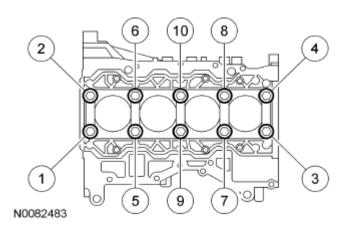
Identifying Crankshaft Cap Bolts Removing Sequence Courtesy of FORD MOTOR CO.
